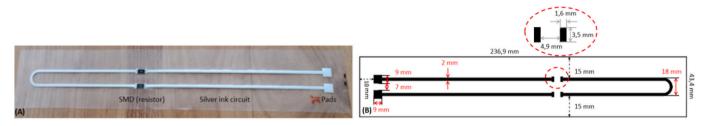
(A) A screen printed stretchable electronics sample and (B) the dimensions of the samples and pattern.
